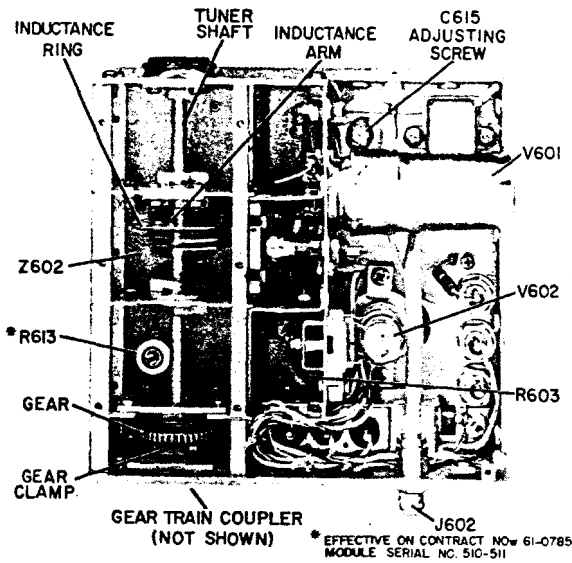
Power Amplifier, Rear View, Covers Removed
